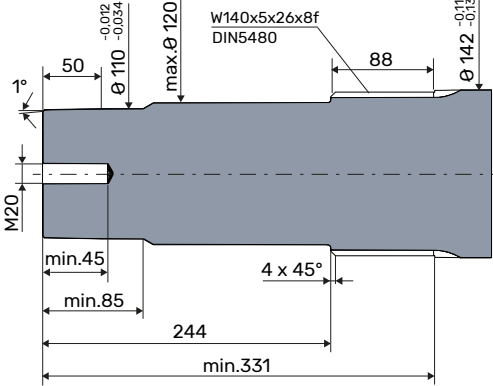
Dimensions of the recommended shaft design for type 1A. Material ex. 42CrMo4.
